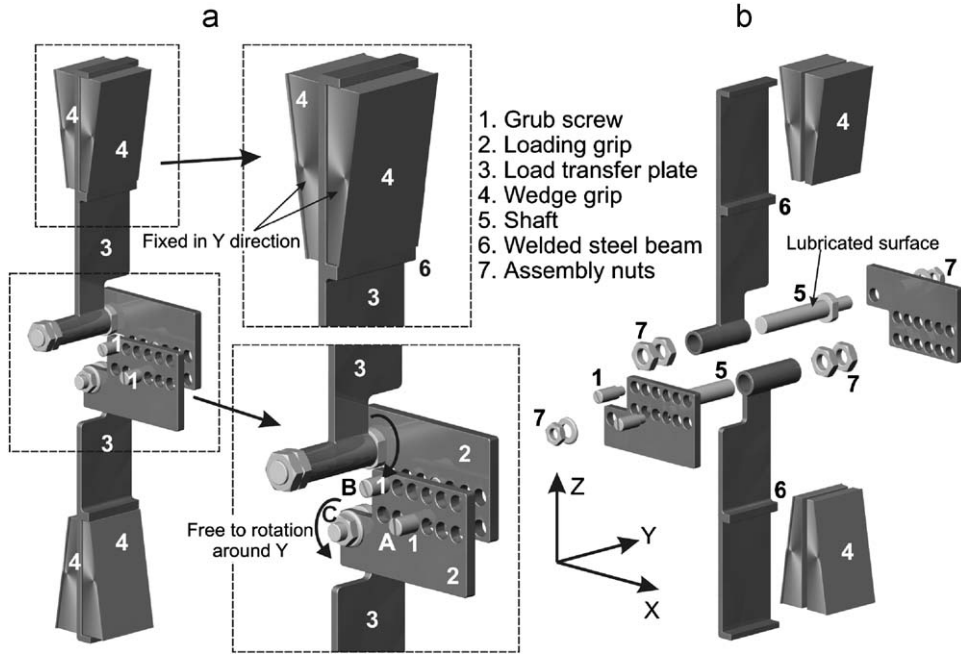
The 3D view of the experimental equipment. Assembled state (a) and exploded view (b).
